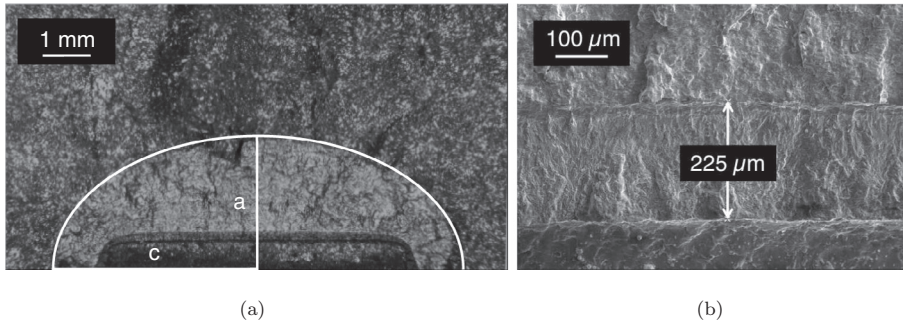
Fracture surface of a large scale specimen tested for 250 cycles at $R = -1$ and $\epsilon_a = 0.0035$ mm/mm. (a) Semi-elliptical fatigue crack after the end of the test; (b) SEM detail of the precrack.
